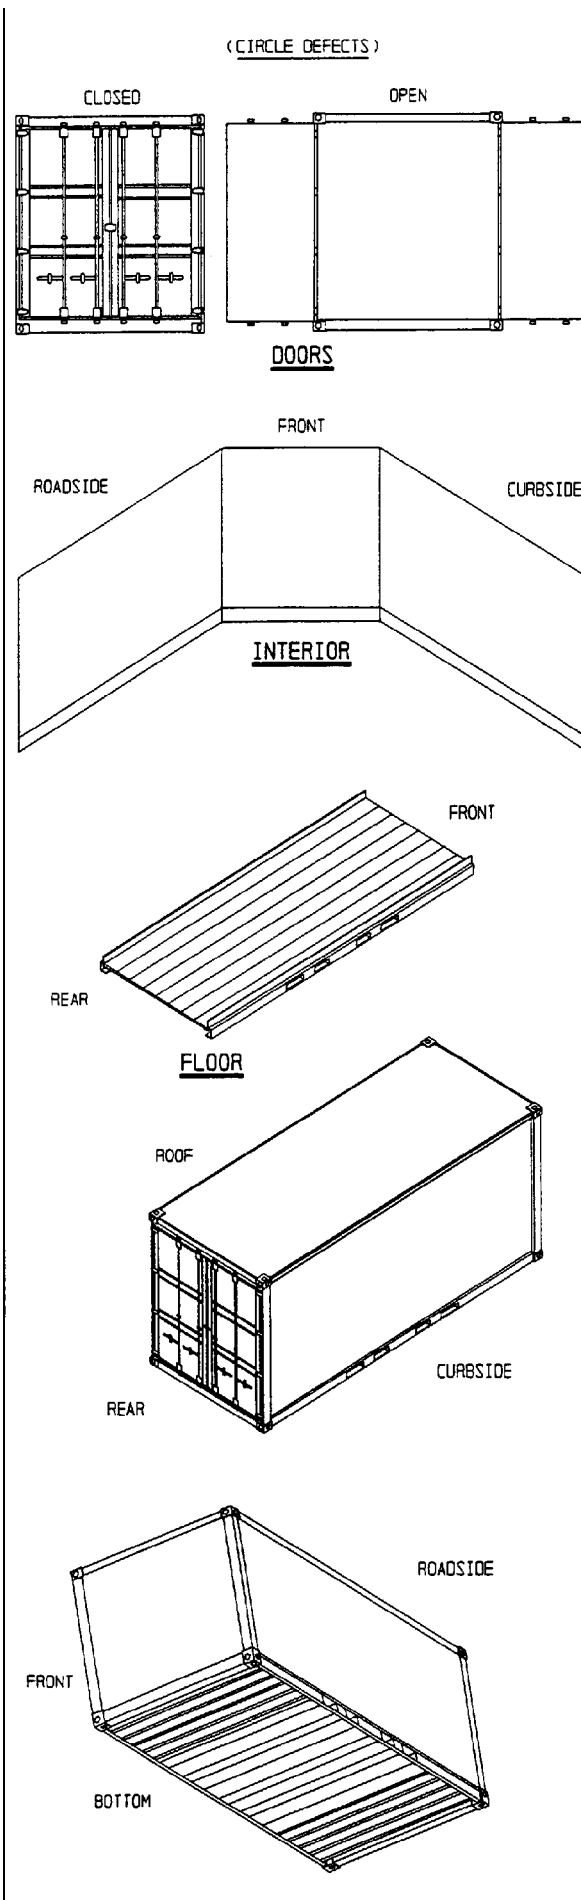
END - OPENING CONTAINER INSPECTION CHECKLIST
